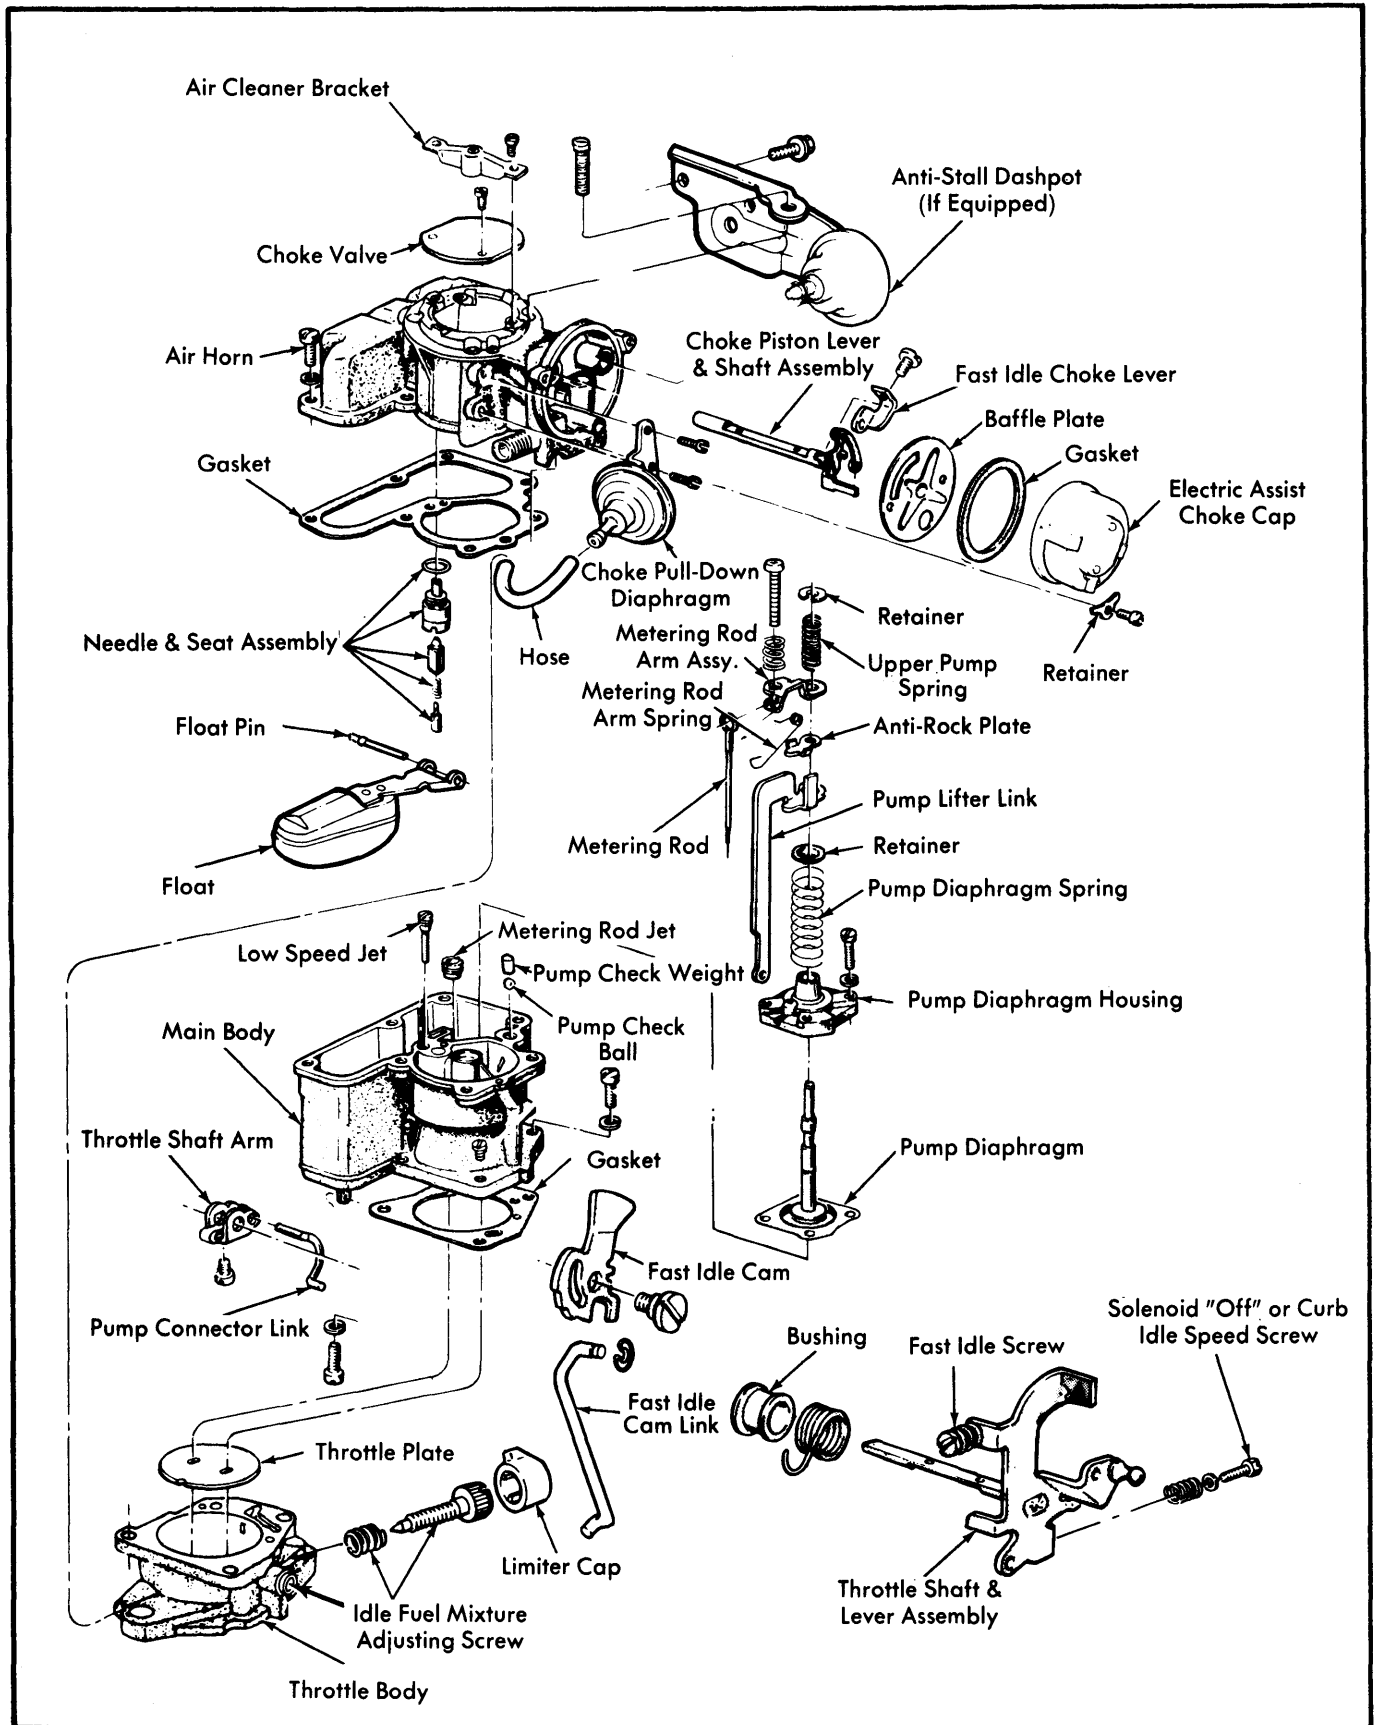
Exploded View of Carter Model YFA 1-Barrel Carburetor
